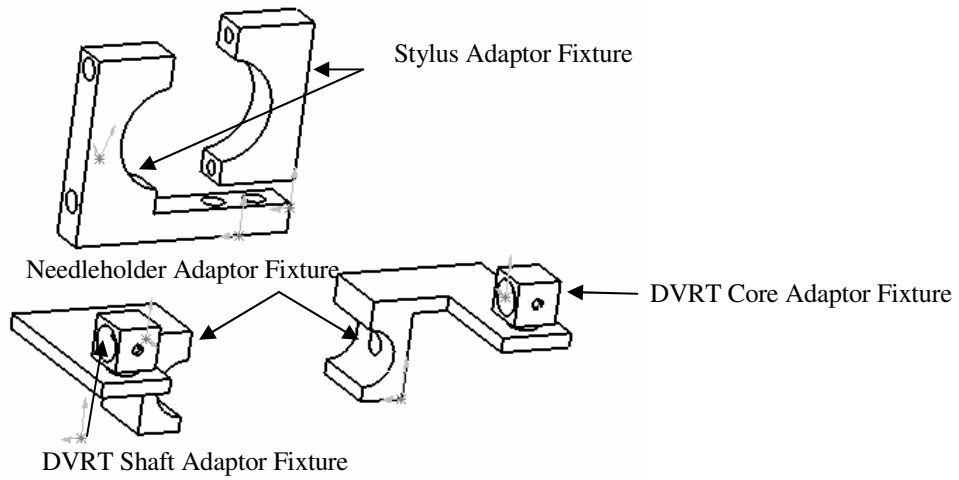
Engineering Part Drawing of the Fixture Components
